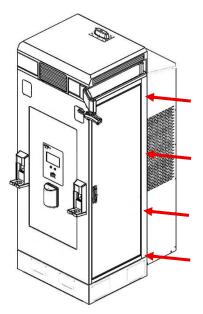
Use caulk remover in between Charger's back wall and heat exchanger (HX)
